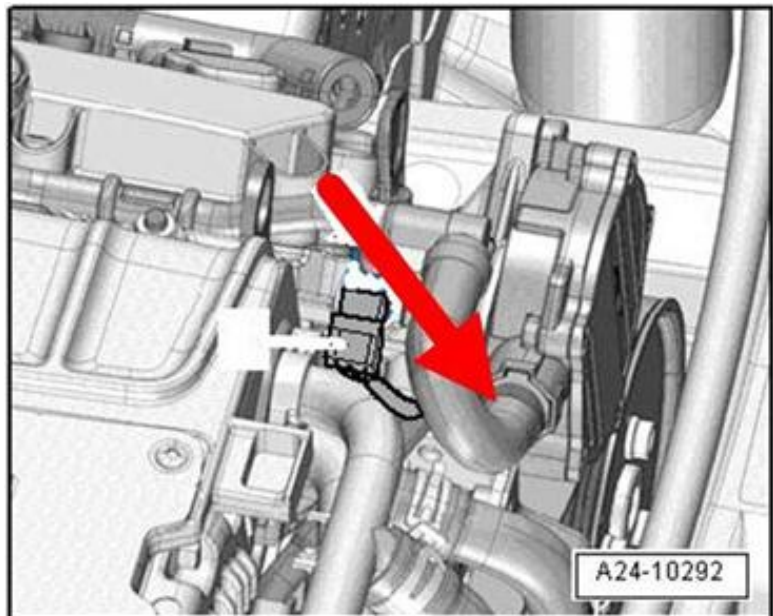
Sensors and valve that need to be disconnected are circled in red.
